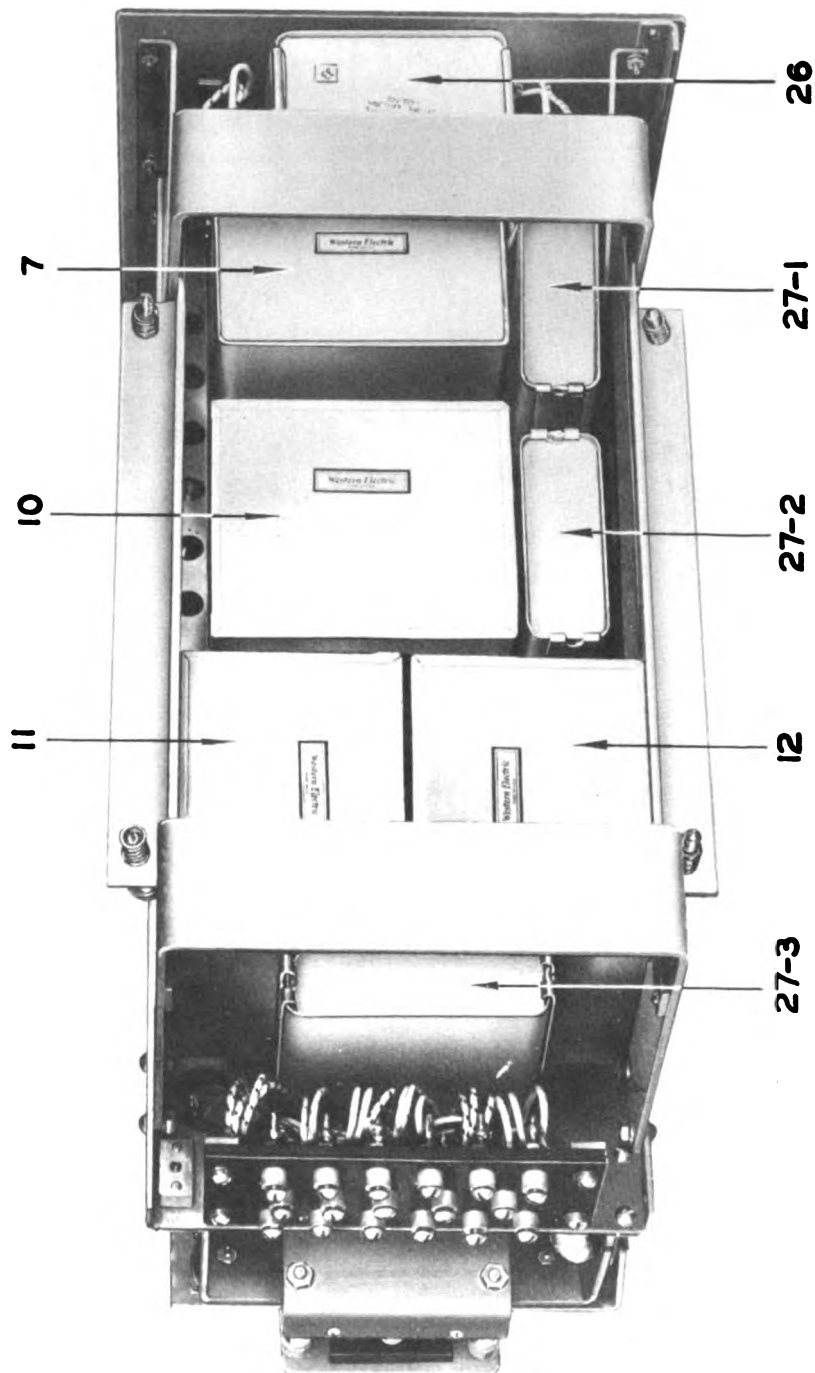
POWER SUPPLY UNIT, BOTTOM VIEW
